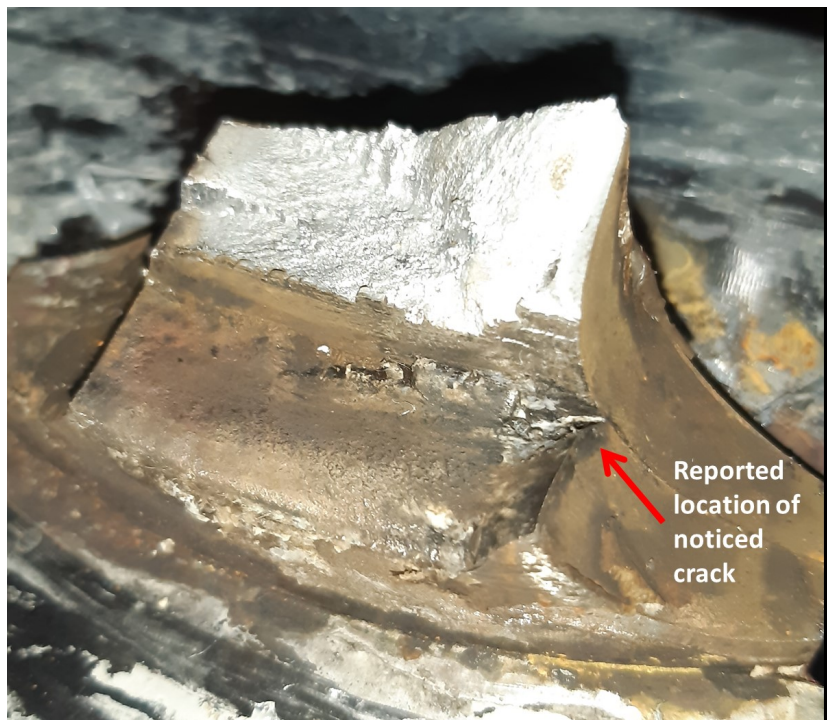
Close-up of lower fracture location (Witness unclear if crack initiated from inside face or outside)
